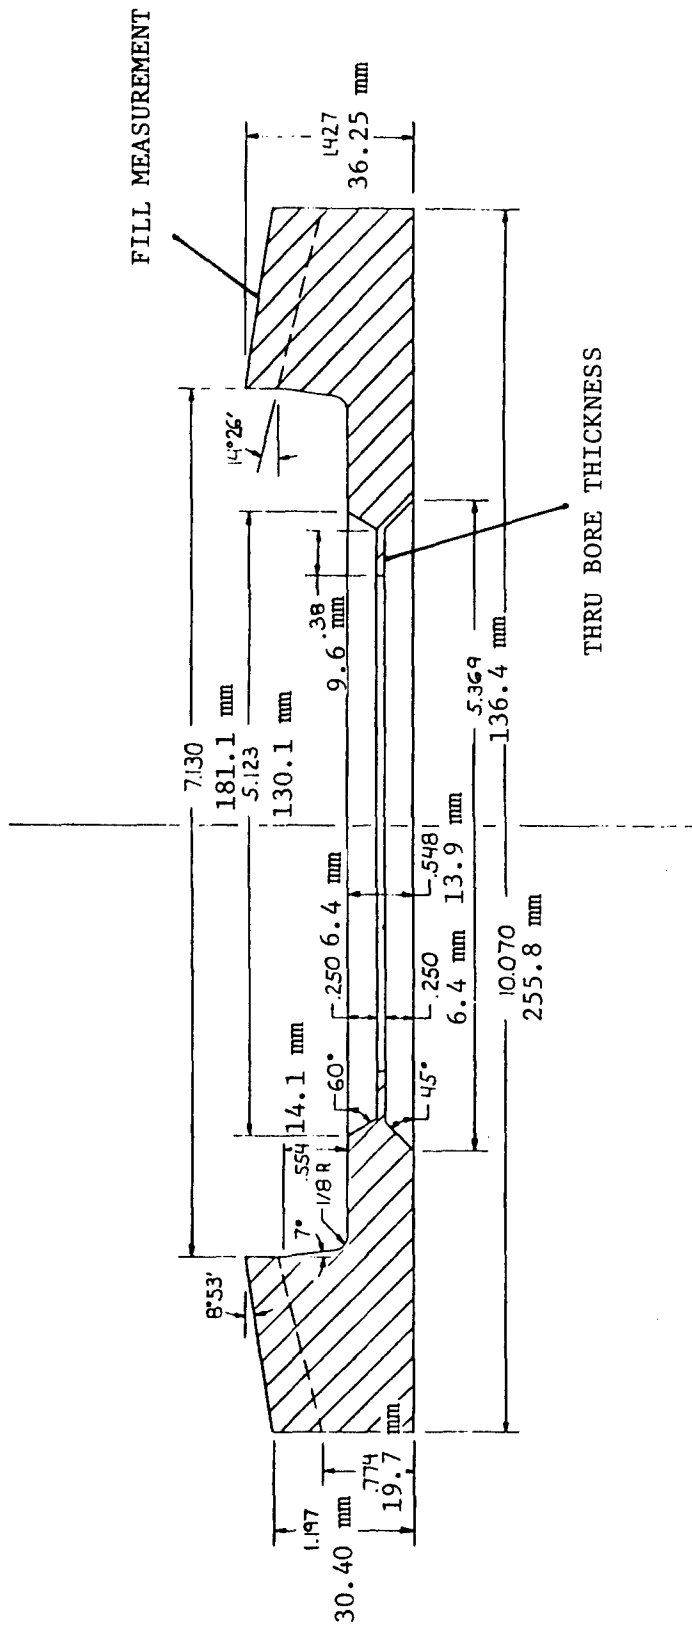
Dimensions of Forged Spiral Bevel Gears
